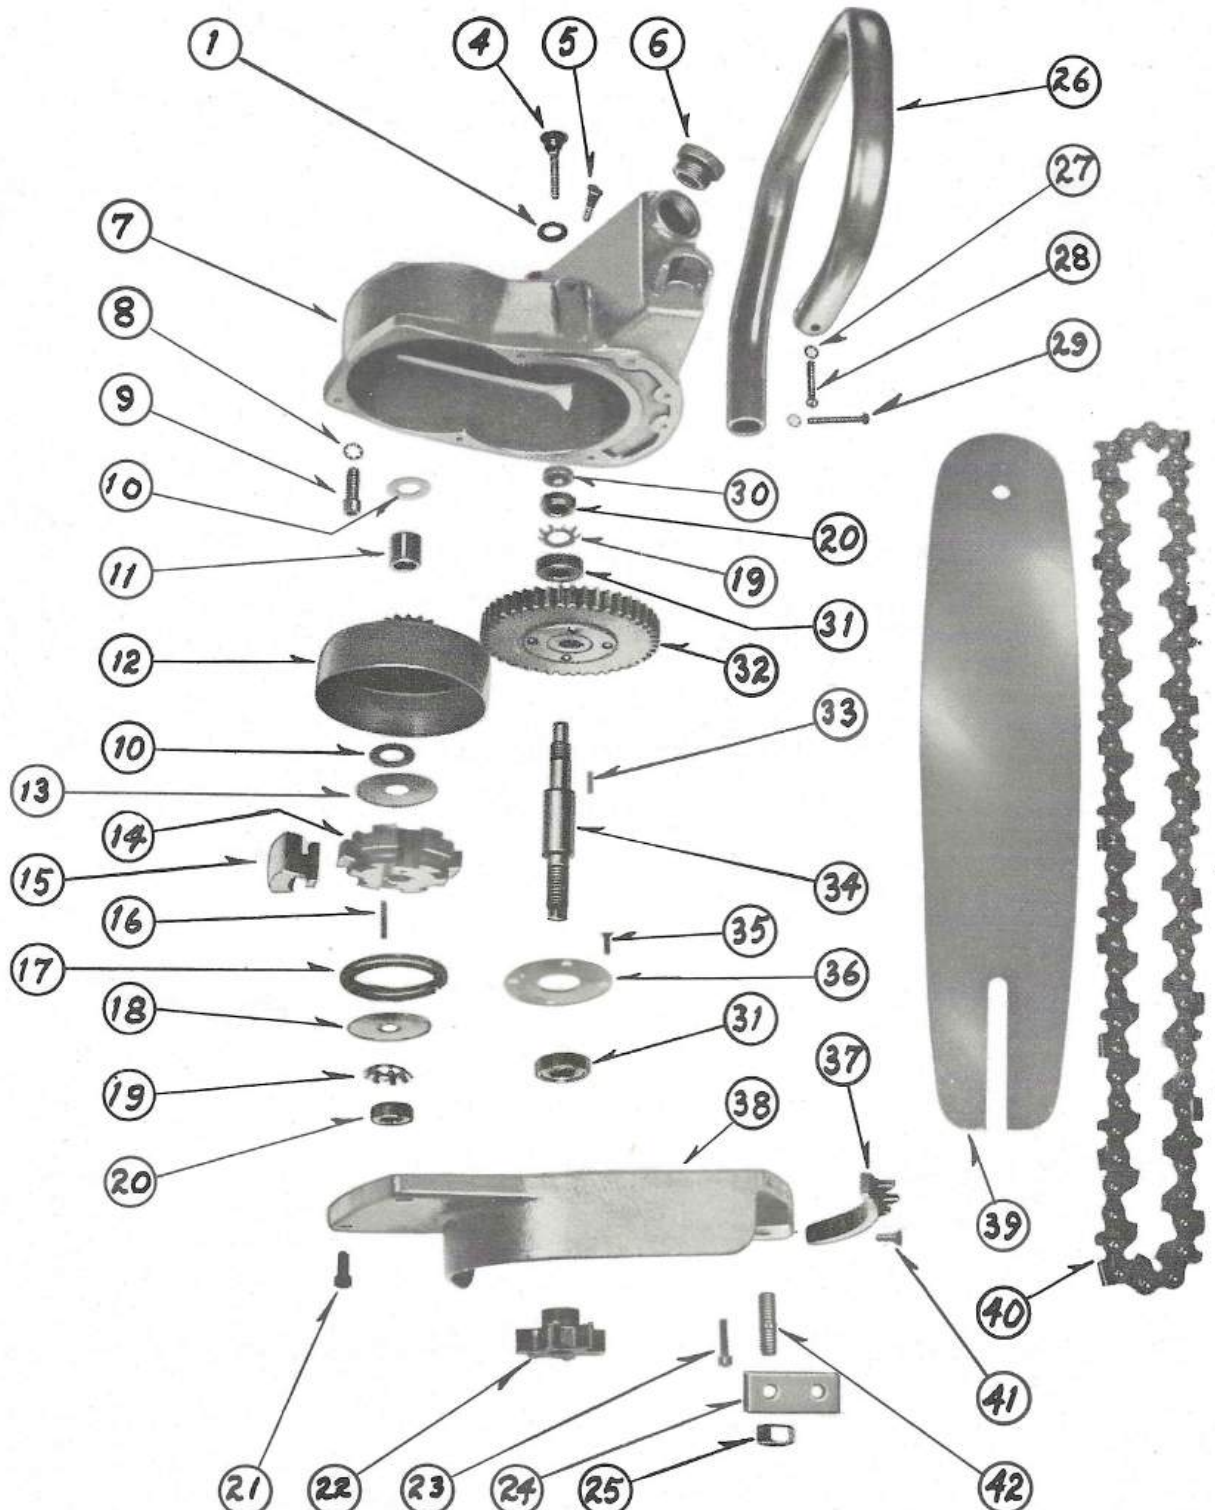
GEAR CASE ASSEMBLY
